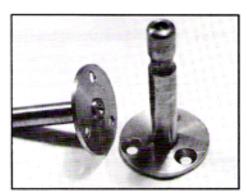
The metal axle shafts and screw plates must fit snugly into the center recess.
